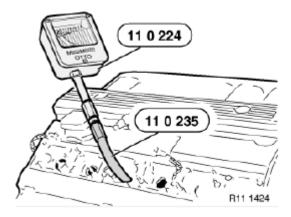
Identifying Special Tool 110 224 And 110 235 Courtesy of BMW OF NORTH AMERICA, INC.
